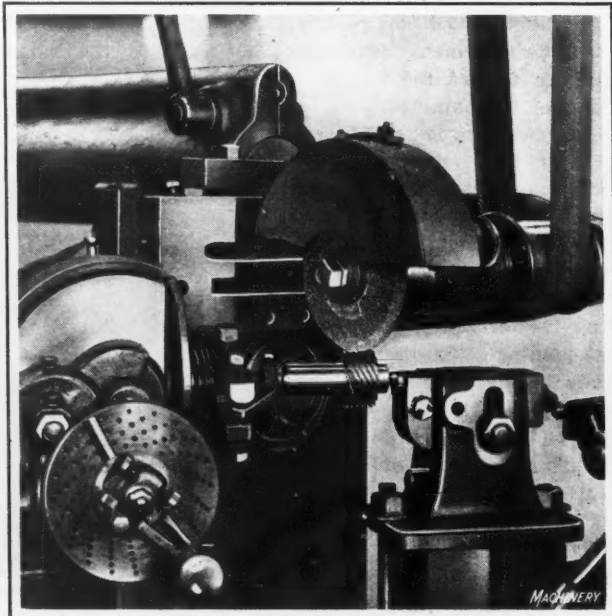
Formed-wheel Process applied to Helical Gear Grinding
